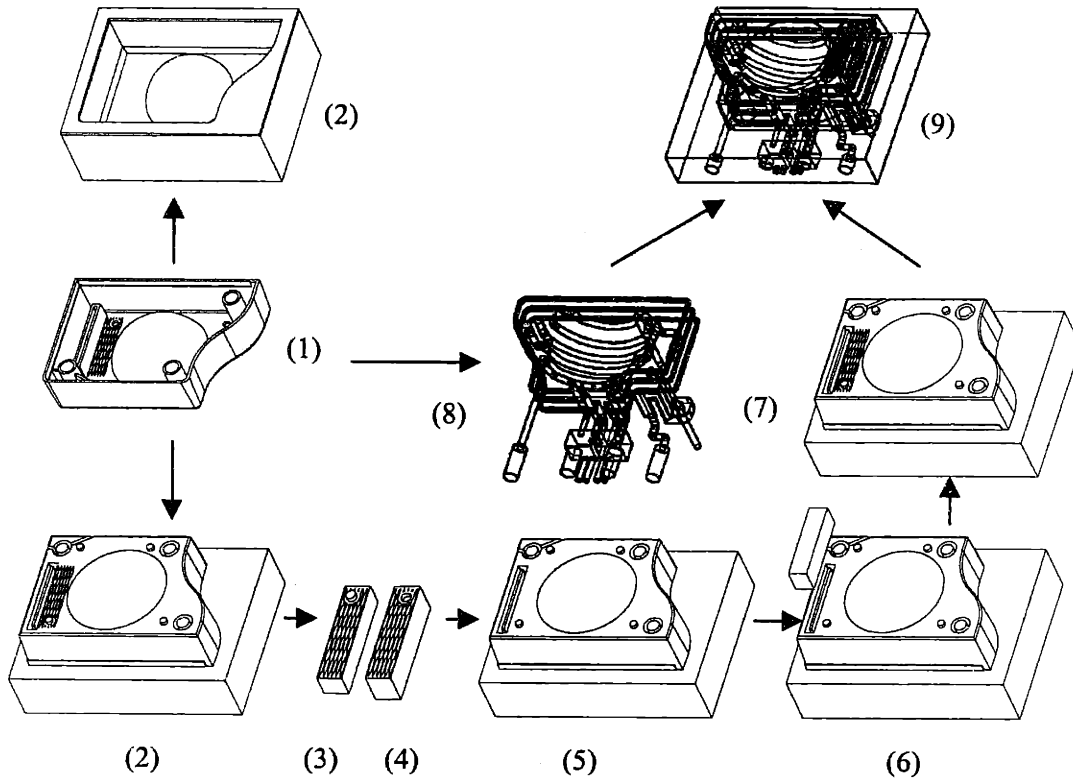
Steps to make offset to the benchmark tool for the manufacturing tolerance
